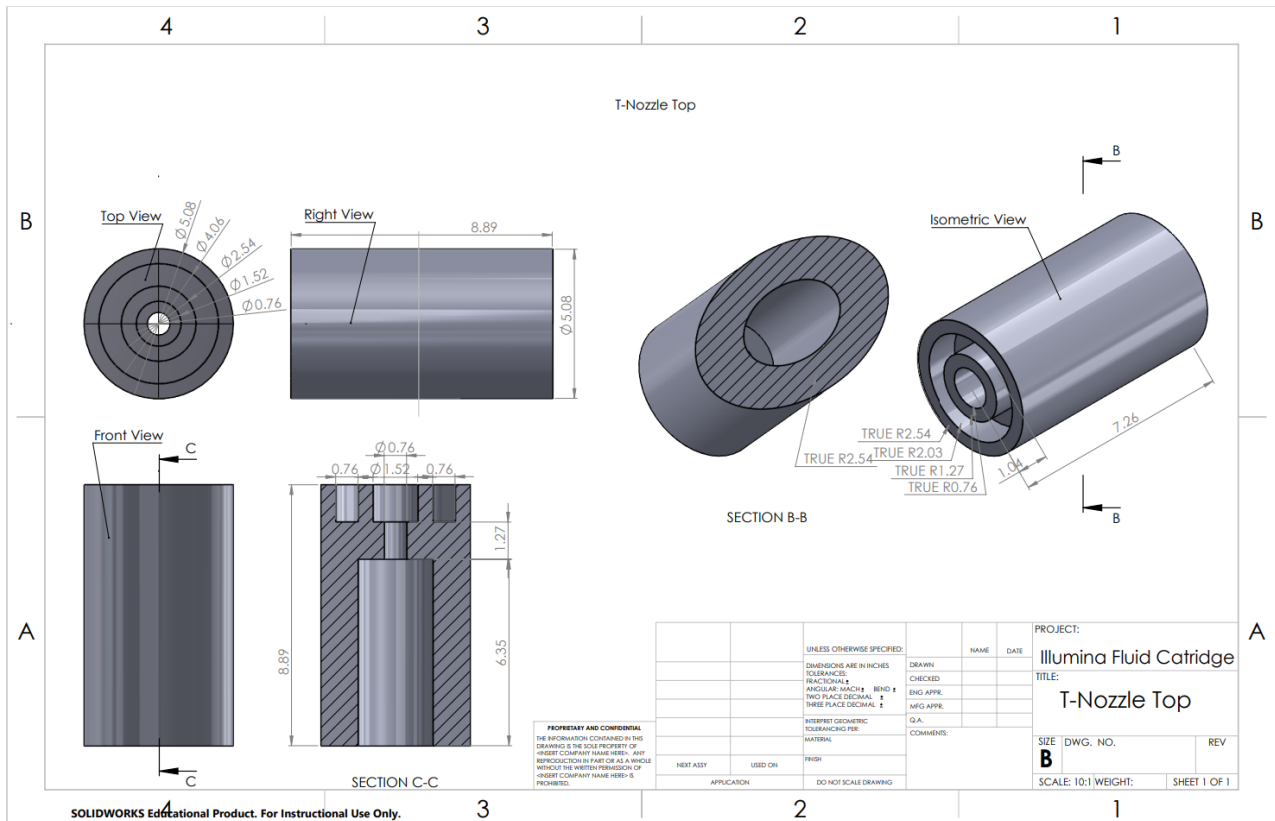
Technical drawing of the internal view of the T-nozzle top. Refer to Appendix C for detailed view.
